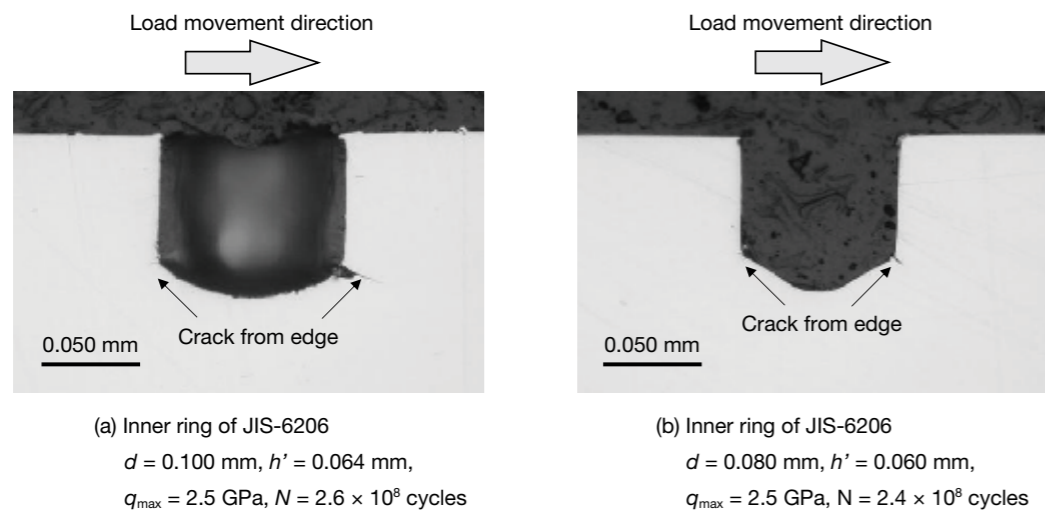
Optical micrographs of drilled holes with small cracks in unbroken bearings. Small cracks were observed at the edge.
